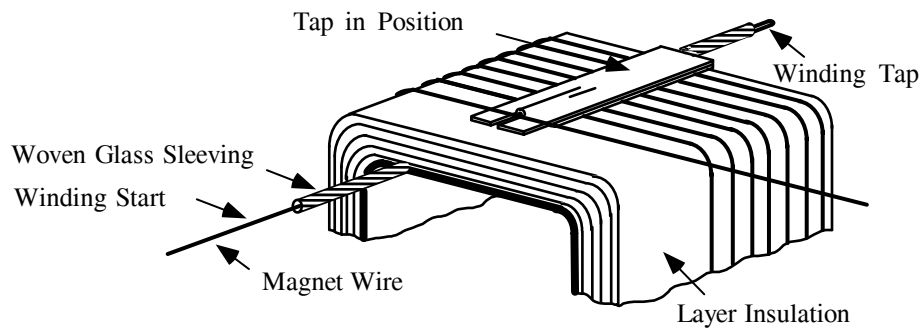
Tap Lead Crossing Over a Winding, Using Sleeving.
